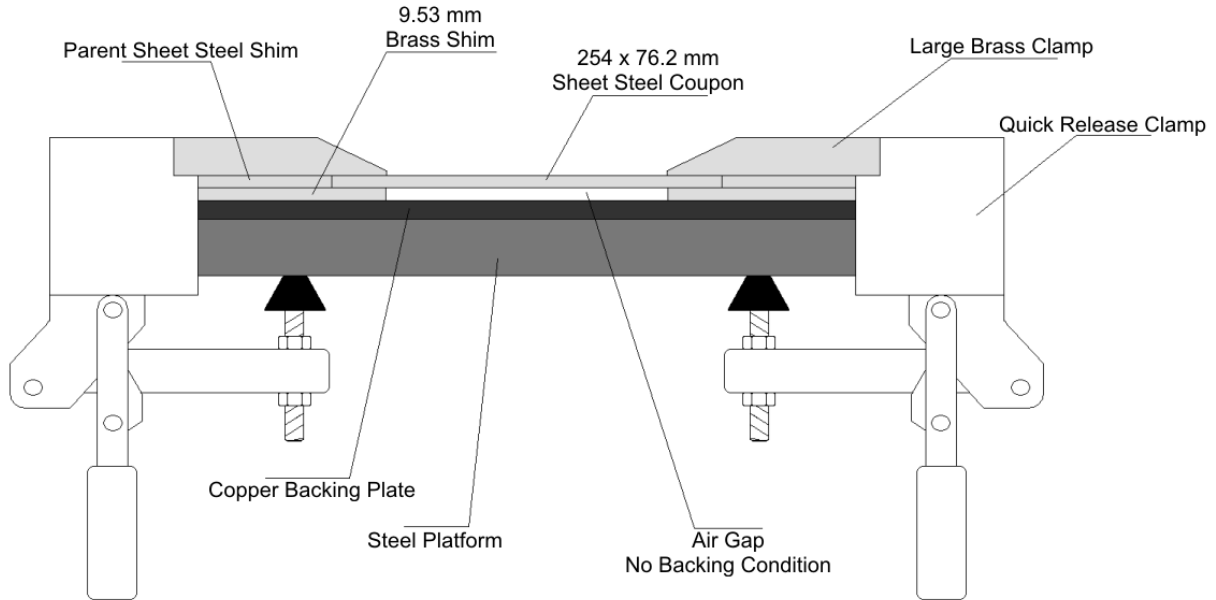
A cross-sectioned schematic showing the setup for a 254×76.2 mm sheet steel coupon and clamping fixture. Image not to scale.
